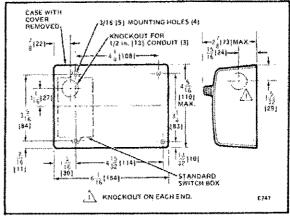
T631 INSTALLATION DIMENSIONS, IN in. [mm SHOWN IN BRACKETS].
